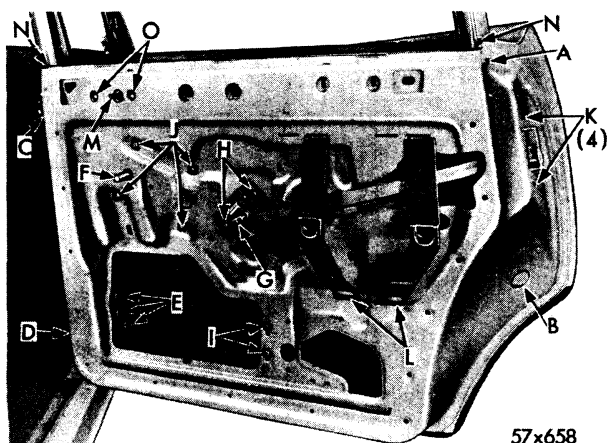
Rear Door Assembly (Four-Door Sedan)
